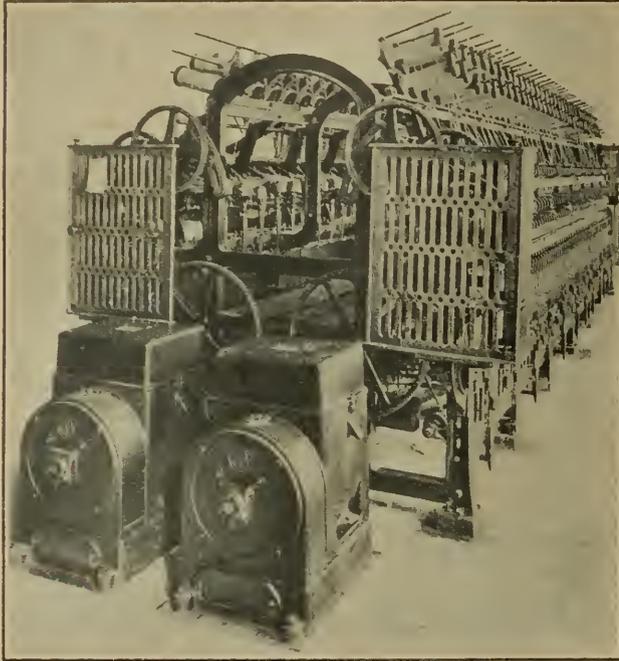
4 IN. LIFT DRY-SPINNING MACHINE WITH TWO SPINDLE SHAFTS, DRIVEN BY TWO INDEPENDENT THREE-PHASE COMMUTATOR MOTORS, WITH BUILT-ON REDUCING GEAR.
